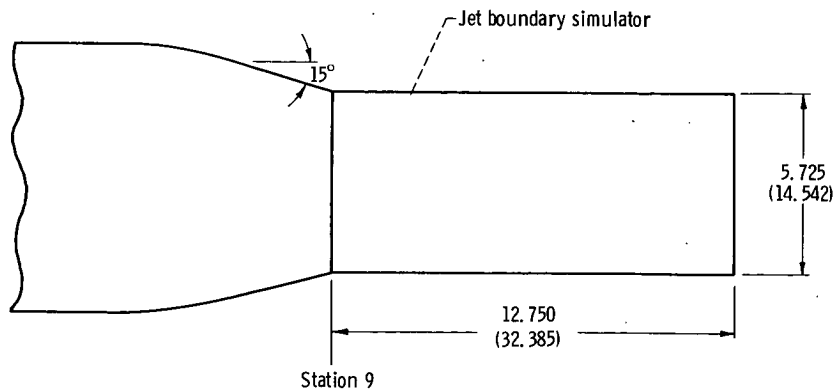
VFE nozzle geometry details (All dimensions are in inches (cm)).
